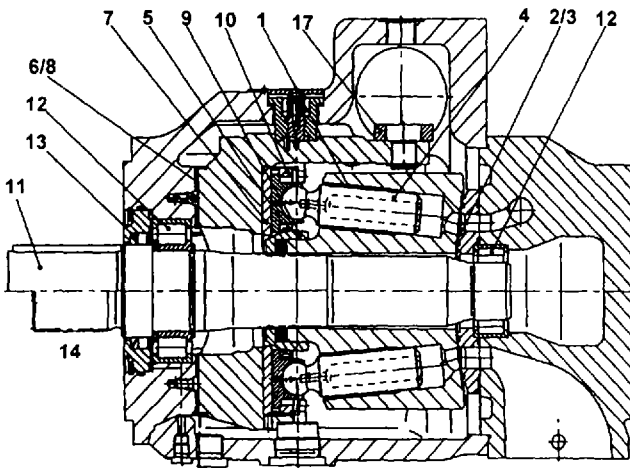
Wear surface TANs for the axial piston pump. See Table 10.8 for part labels.
